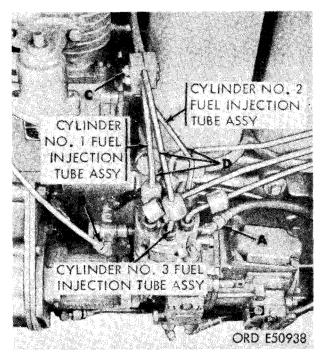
DISCONNECTING OR CON-NECTING FUEL INJECTION PUMP FUEL HOSE AND CYLINDER NO. 1, 2, AND 3 FUEL INJECTION TUBES .
